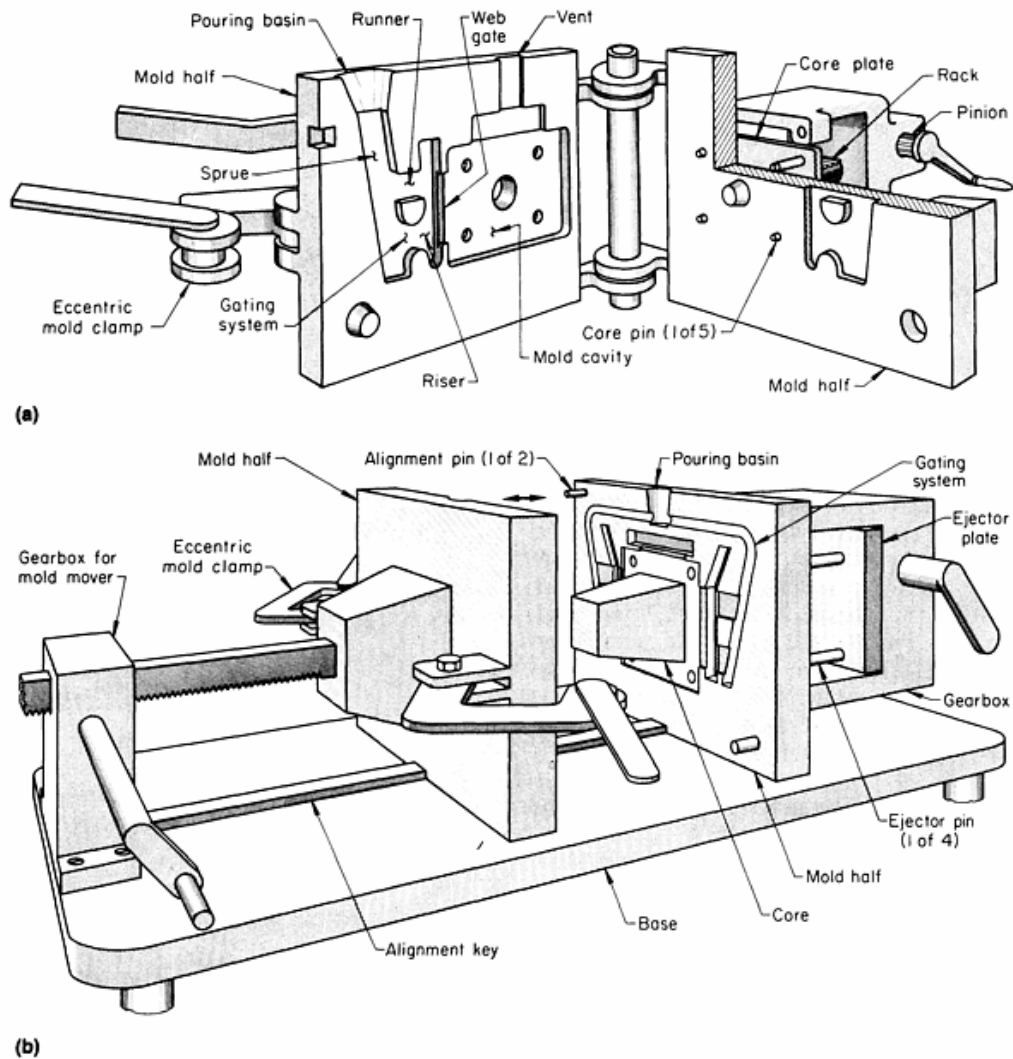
Two examples of manually operated permanent mold casting machines. The top machine would be used for a component with a shallow cavity. The bottom machine would be used for a casting with a deep cavity. (West)
